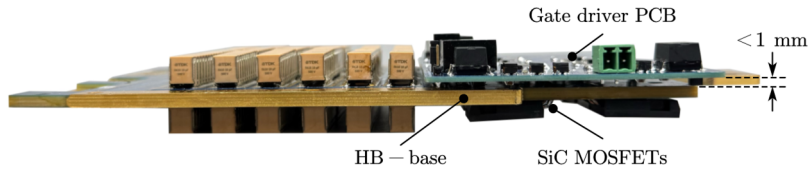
Side view of HB-base driven by a separate gate driver board.
